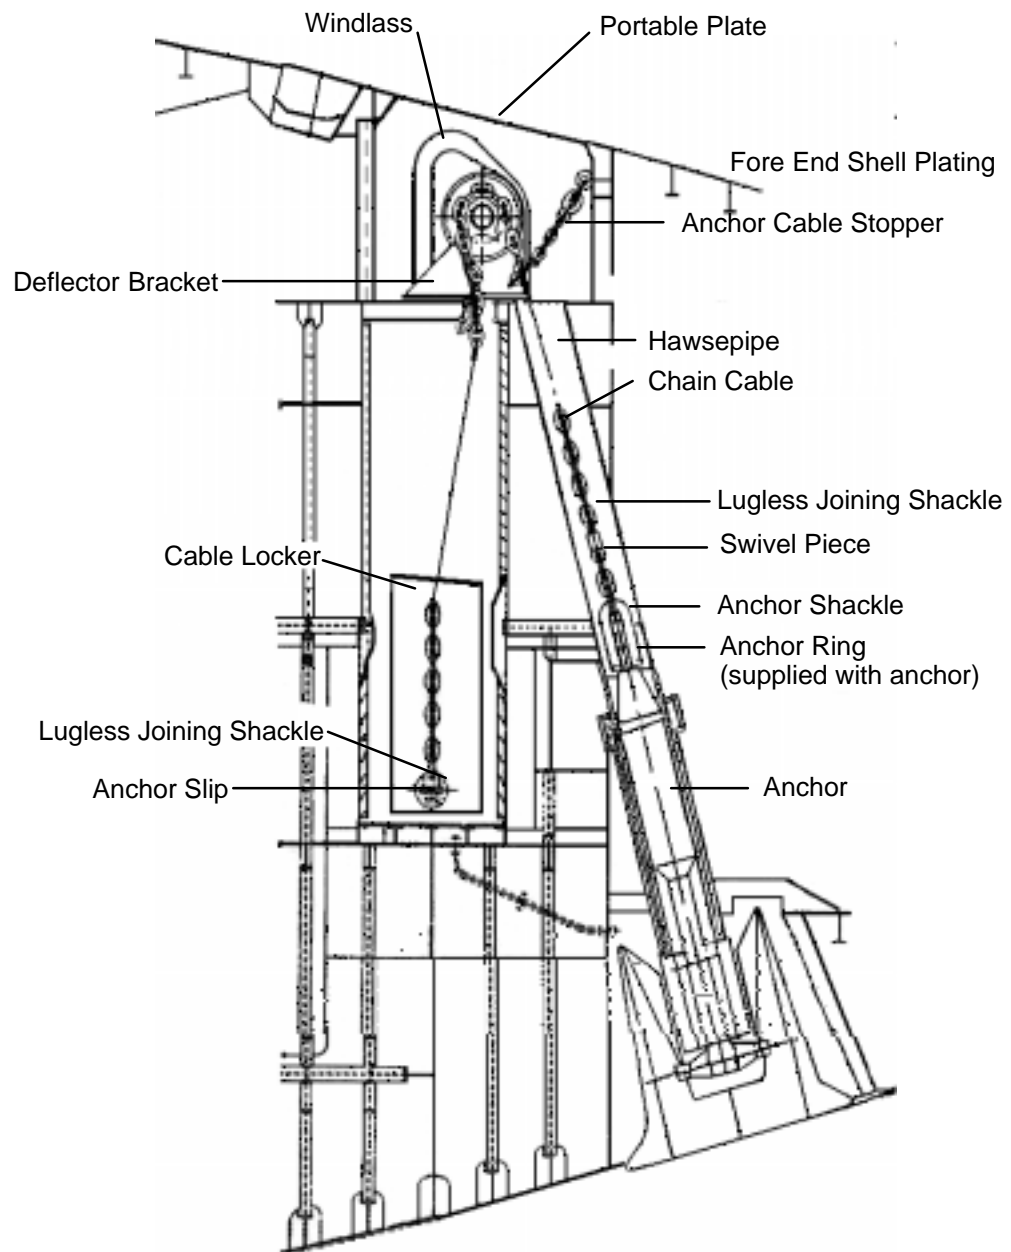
Typical Anchor and Cable Arrangement for Submarines
